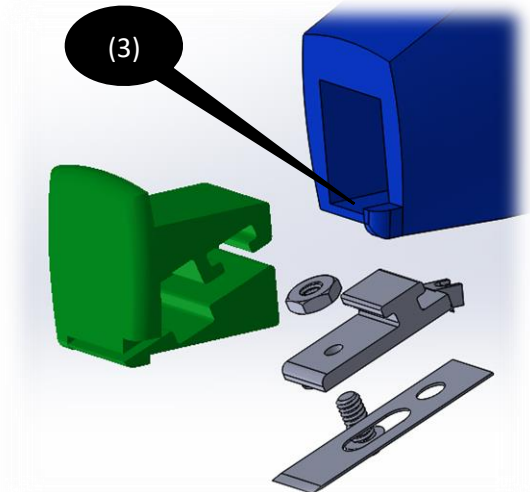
The bottom of the shell (3) was too thin (0.02") for a fastener
